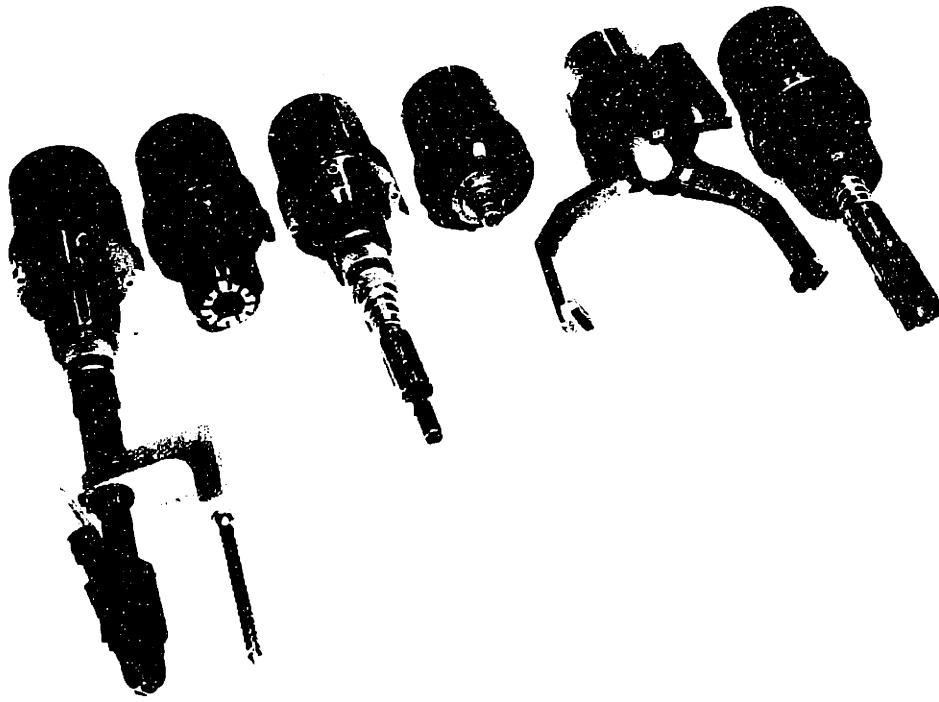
Tools used in the assembly of the automobile alternator. From left to right, screwdriver with automatic screw feed used to drive the short screws, contracting collet tool, screwdriver used to drive the long screws, expanding three-finger tool, large contracting three-finger tool, nutrunner used to torque the rotor onto the nut.
